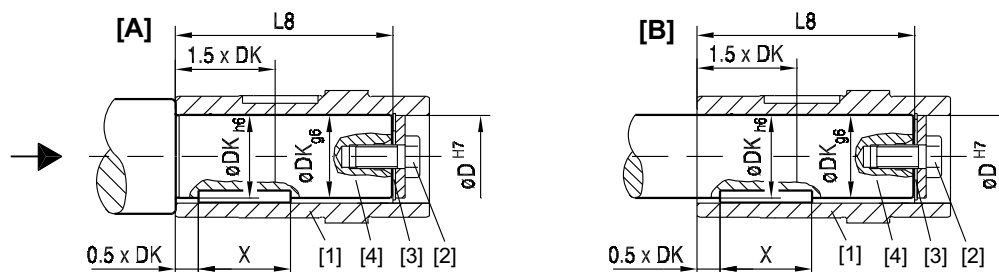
Customer shaft with contact shoulder (A) and without contact shoulder
